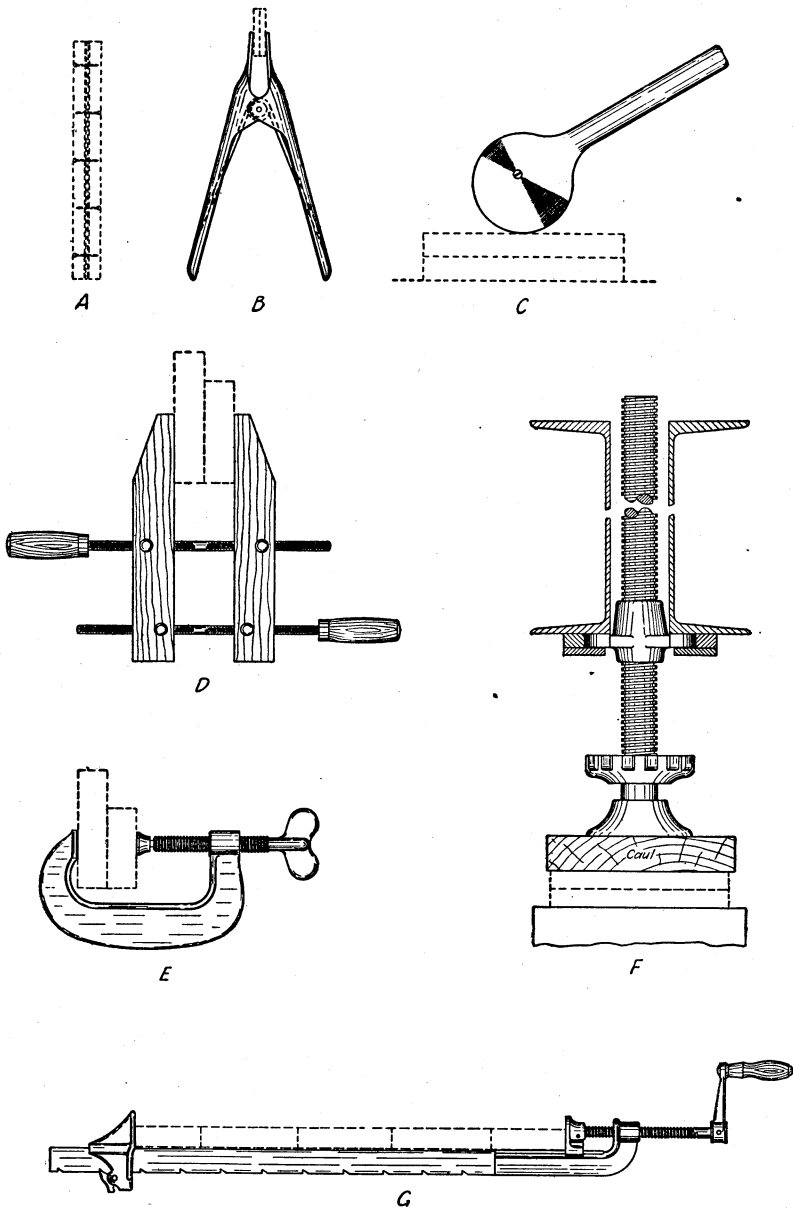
Hand devices used in applying pressure to glue joints: A, Brads or nails; B, spring clamp; C, eccentric clamp; D, wood clamp; E, C clamp; F, jack-screw; G, bar clamp
